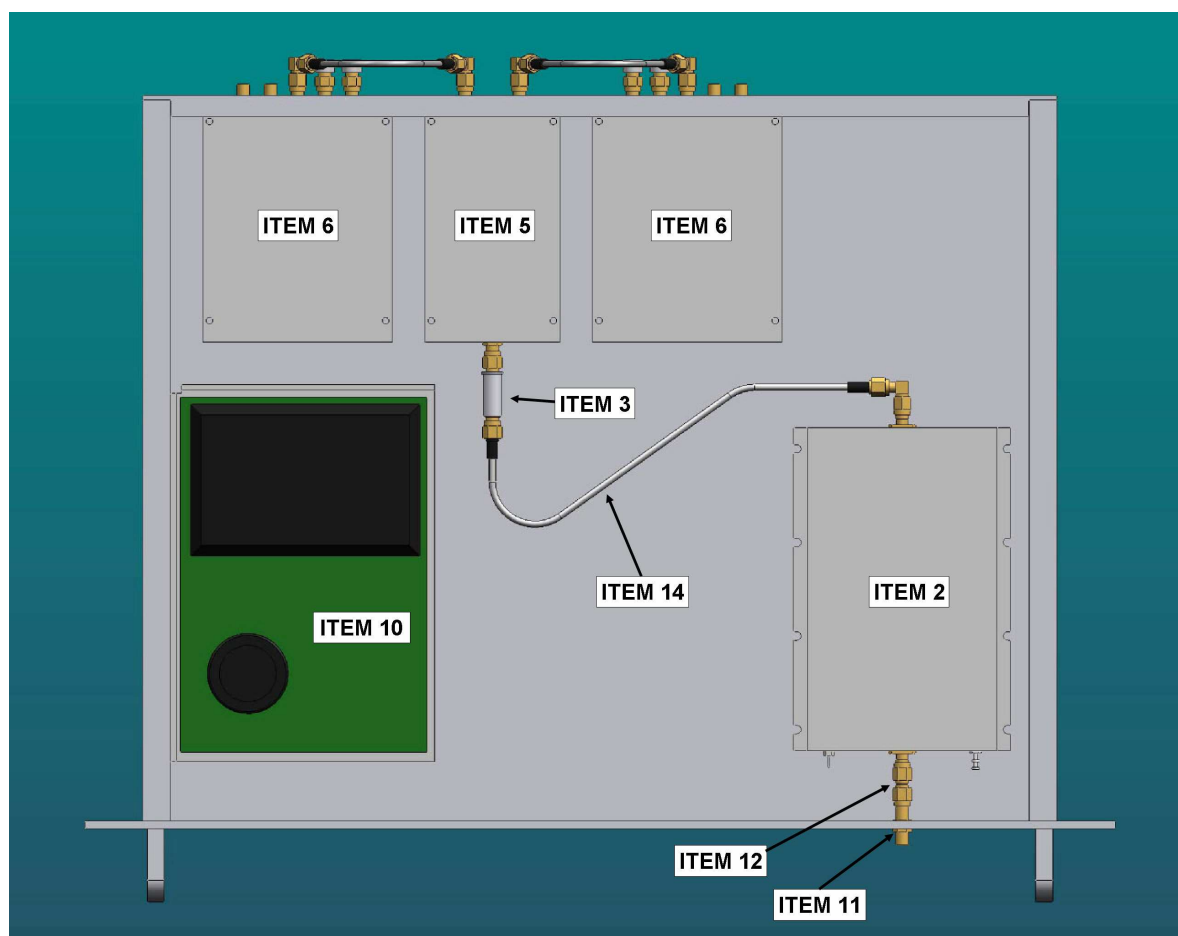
Fixed LO: central rack mechanical assembling (top view).
